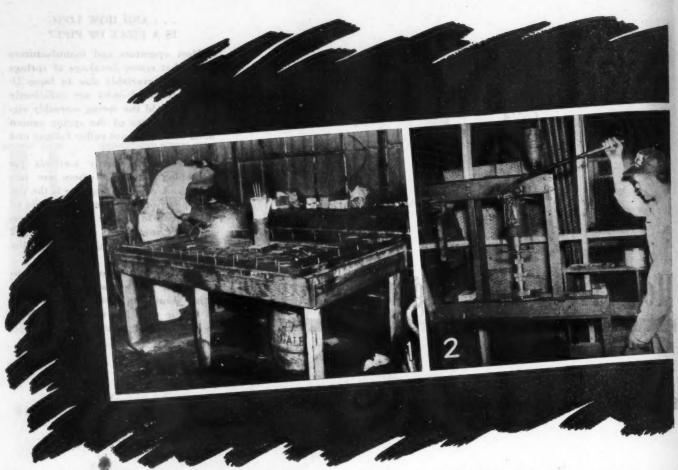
The shop makes its own trailer doors to replace damaged ones. The special jig shown above has been designed for this work. Doors are made with a framework of tubular steel. The outside is of sheet metal; inside is lined with plywood. Fig. 2. A 30-ton hydraulic was inverted and fastened to the frame of a press. This up-side-down hydraulic press is used for pressing gears on and off shafts, for assembling and removing bearings and for similar work
